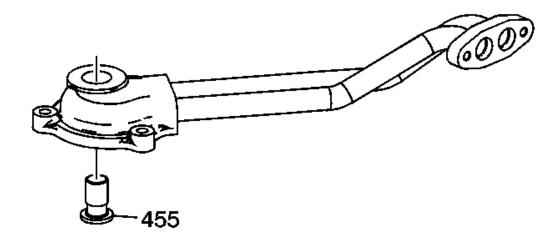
Relief Valve Courtesy of GENERAL MOTORS CORP.
